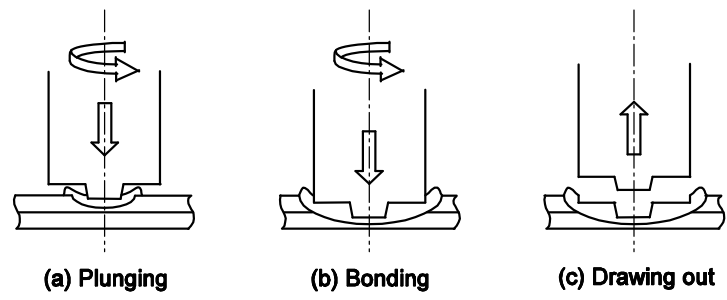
A schematic illustration of friction stir spot welding process.
